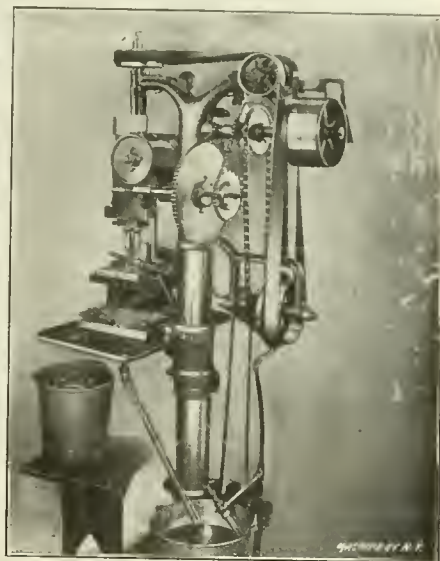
Reaming the Rivet and Bushing Holes in Side Pieces
